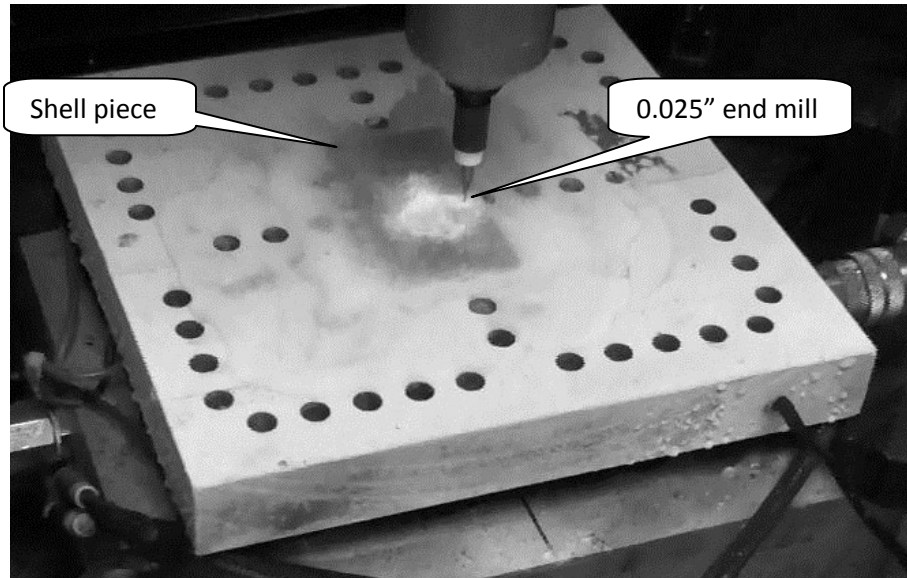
Cutting shell test piece on the freeze plate. Piece on plate (covered in dust) is shown in Figure 40. Cold plate is 8" square.
